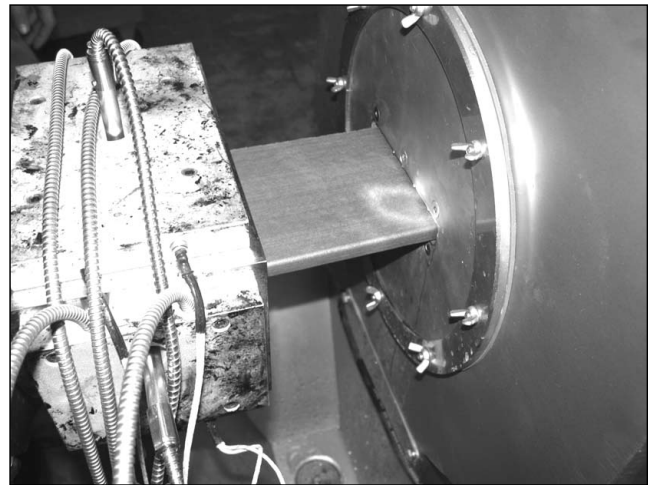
Board exiting the extruder die (left) and entering cooling tank (right).
